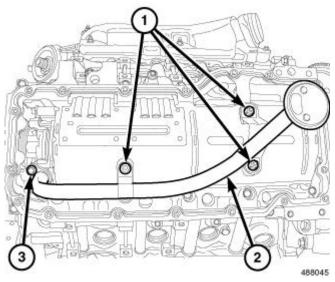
Identifying Oil Pickup Tube Courtesy of CHRYSLER LLC
